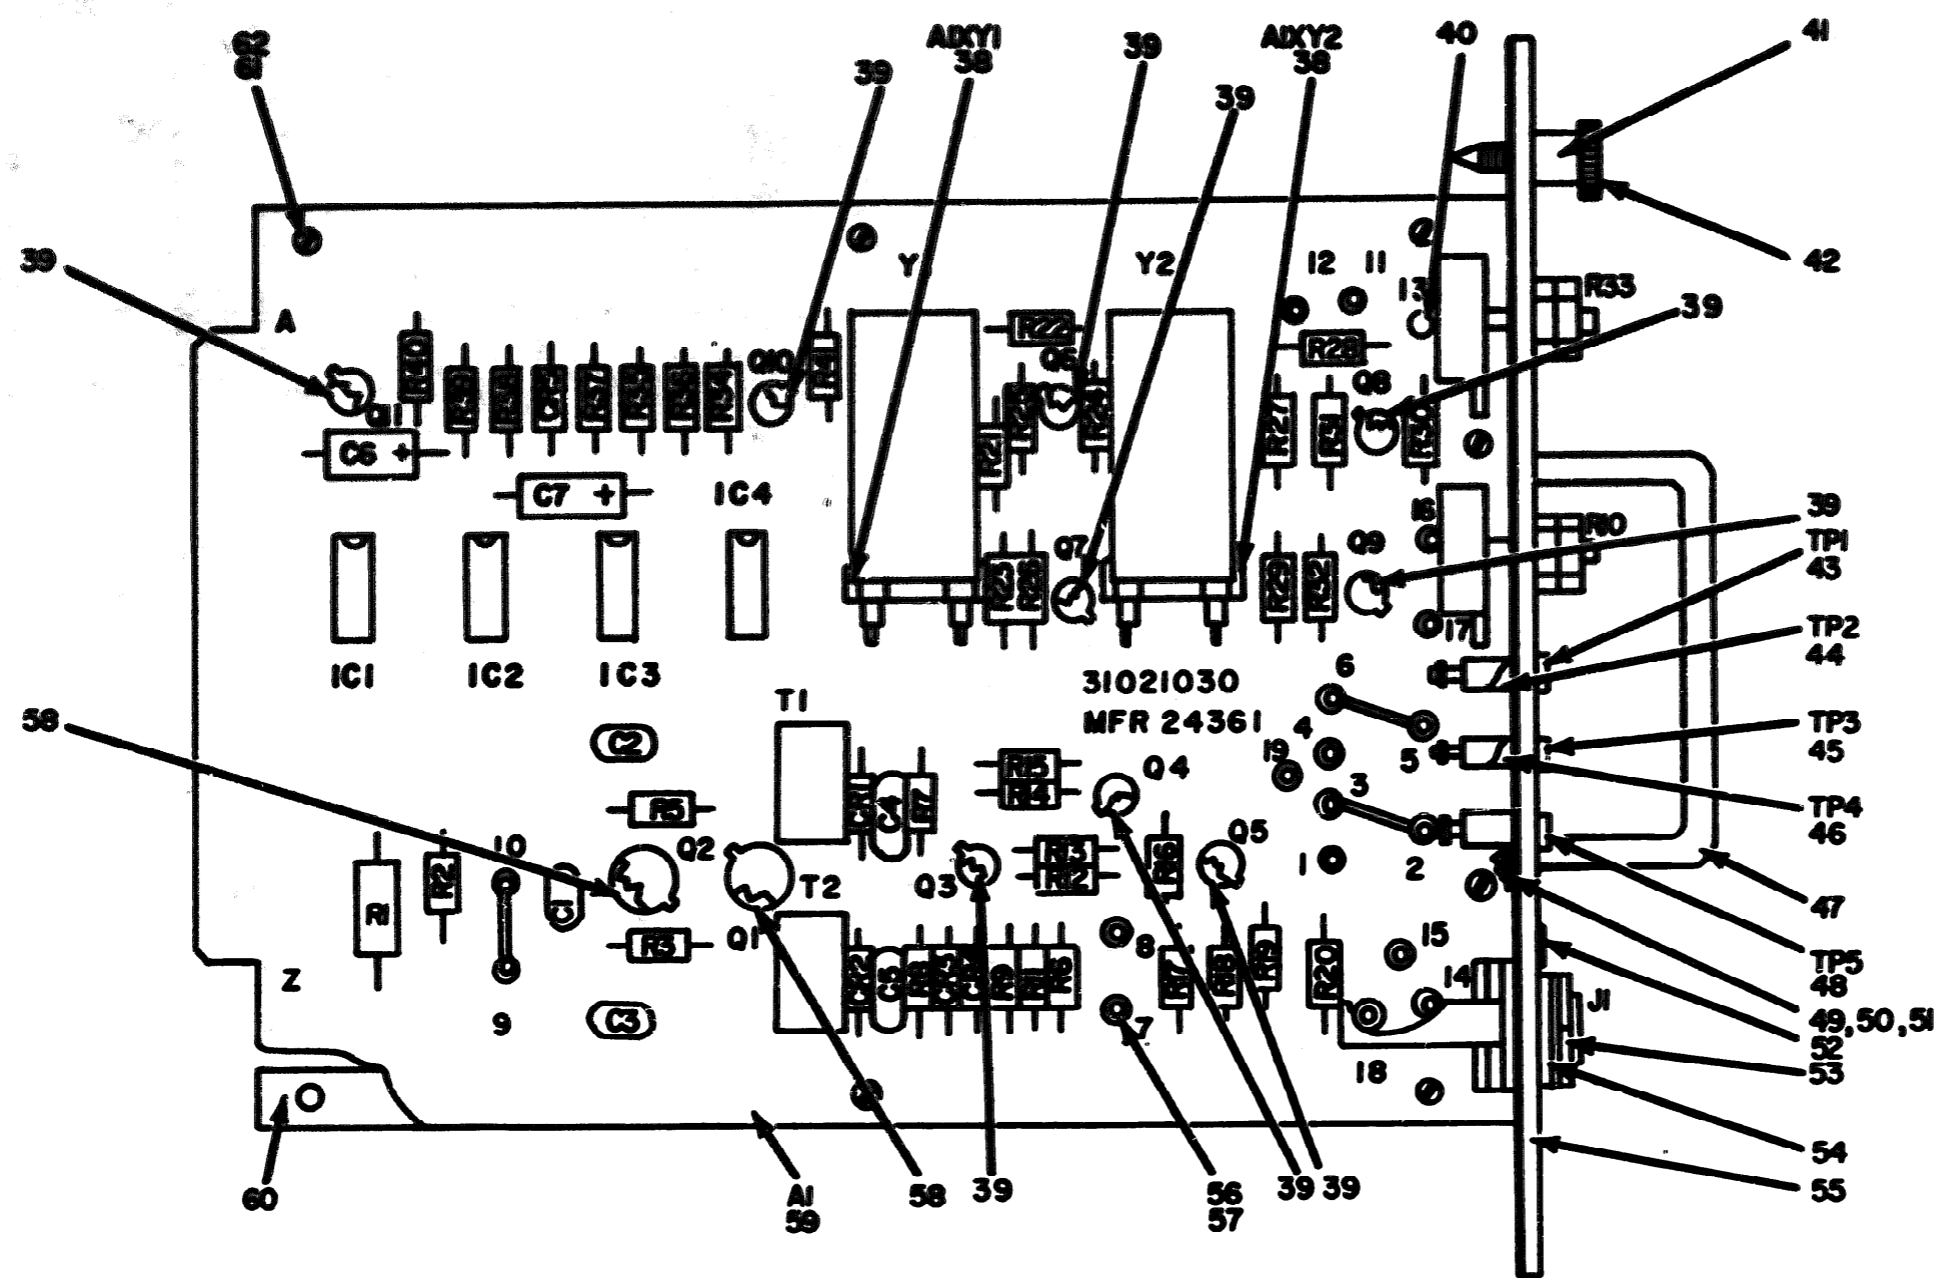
Tone Converter Assembly (A3) (Sheet 2 of 2)
